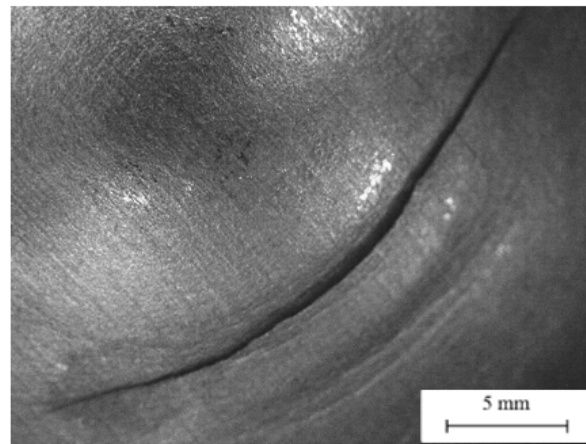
Typical fracture surface of a disk-shaped sample in cover steel sheet at the onset of failure.
